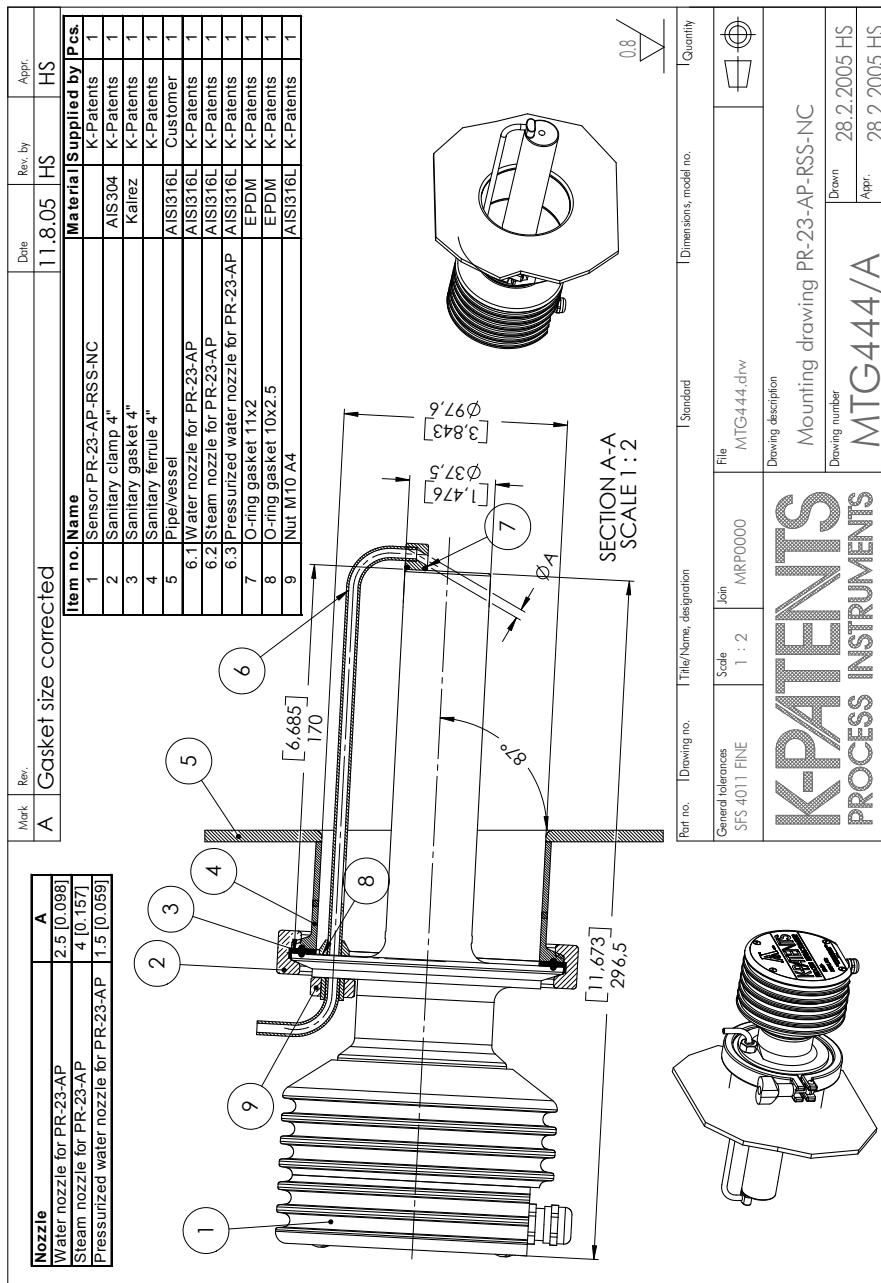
Mounting of the wash nozzle for Sanitary probe refractometer PR-23-AP
